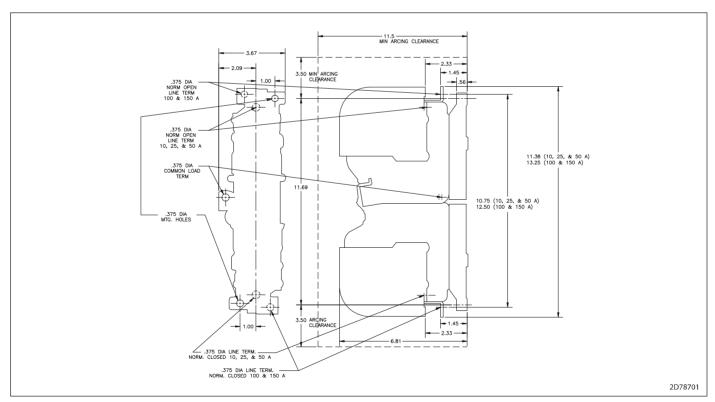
Dimension Drawing of 1NO and 1NC Pole ME Contactor (dimensions in inches)
